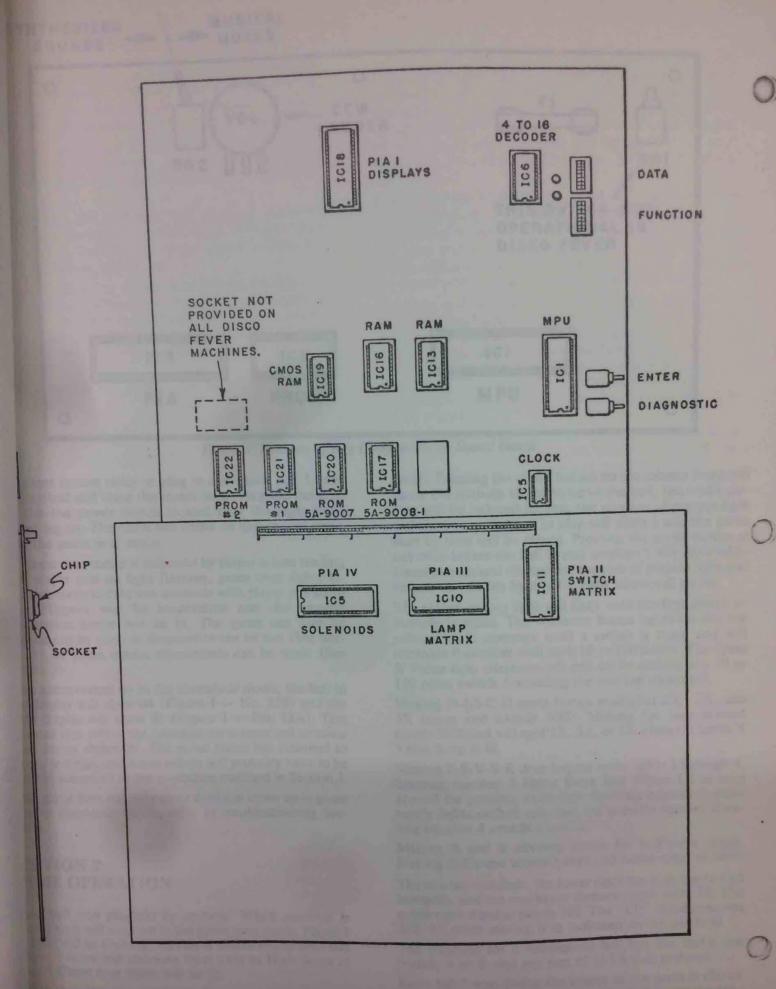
Location of Socketed Components and Switches on CPU and Driver Boards
